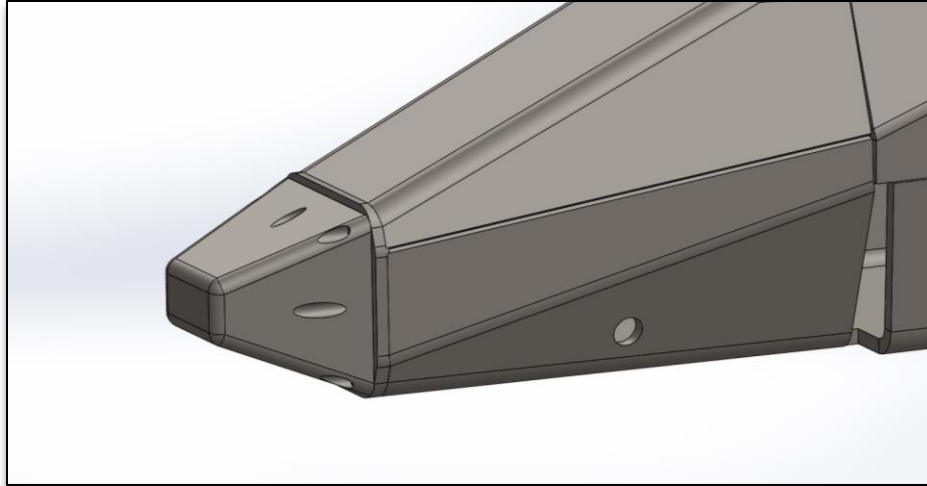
Assembled View of Impact Attenuator, Anti-Intrusion Plate, and Front Bulkhead
